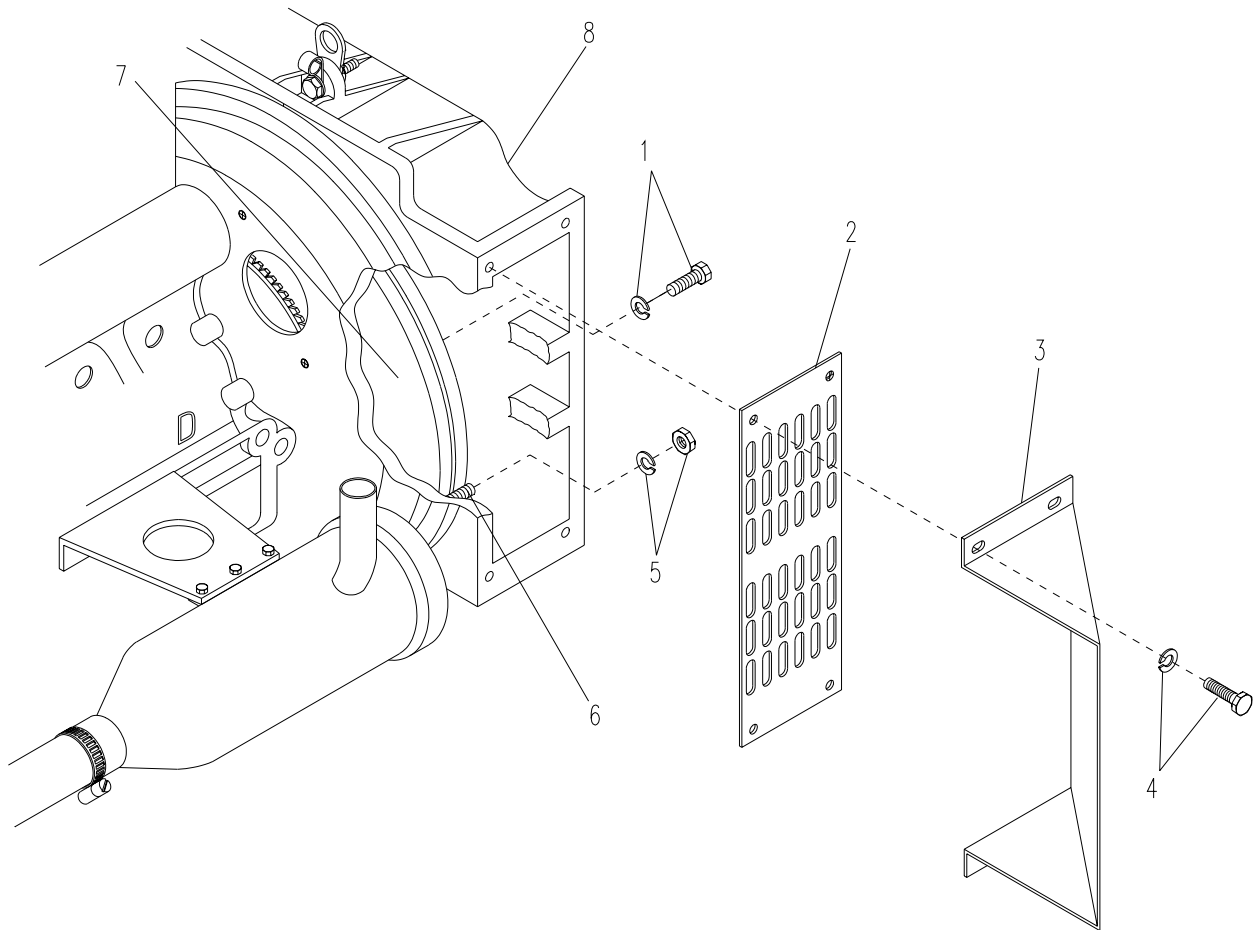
Diesel Engine (Sheet 2 of 11)
